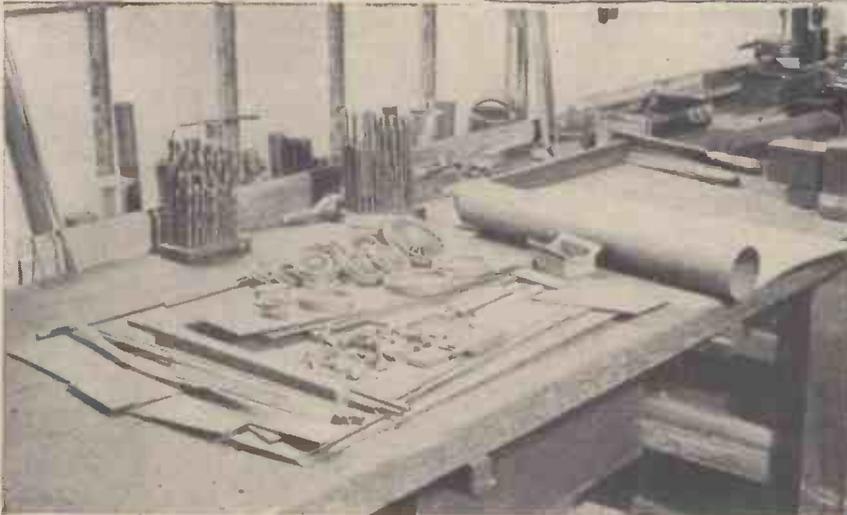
Sheet metal, tubing, and castings used in the construction of the model
